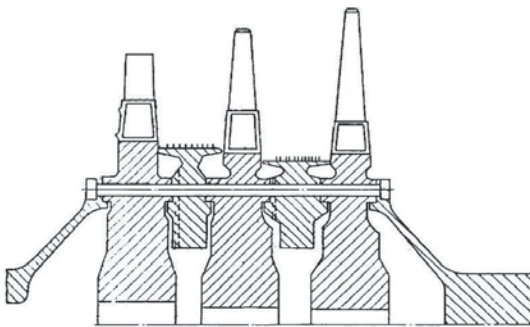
Turbine rotor of the GE Vernova MS7001B engine
